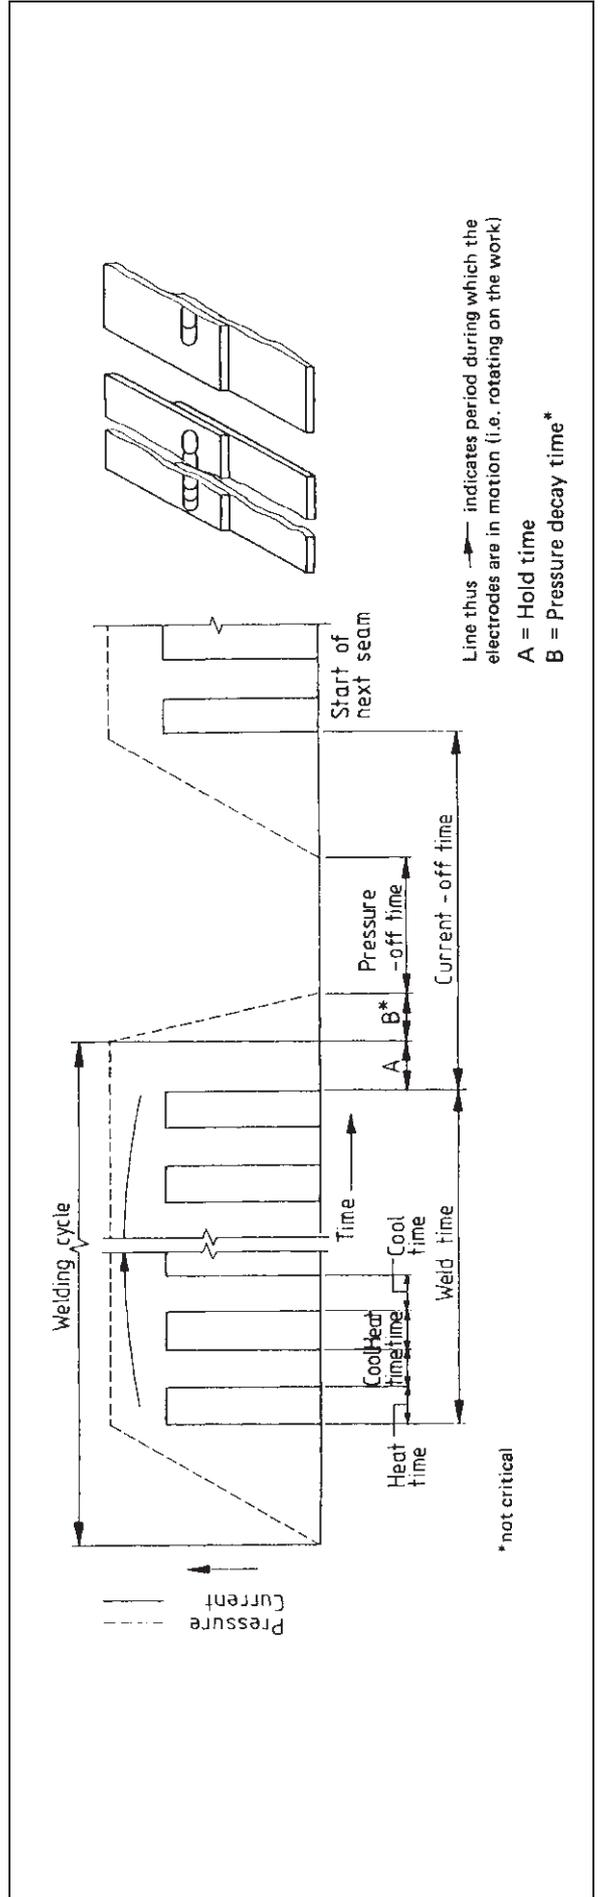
Time and pressure diagram for step-by-step seam welding
